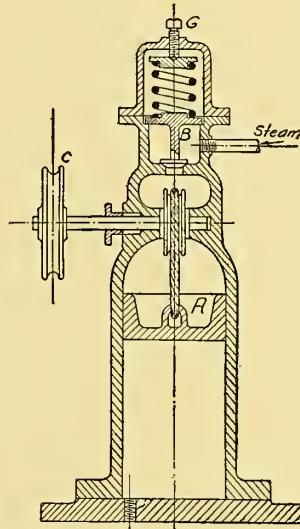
SECTIONAL VIEW OF DAMPER REGULATOR.
